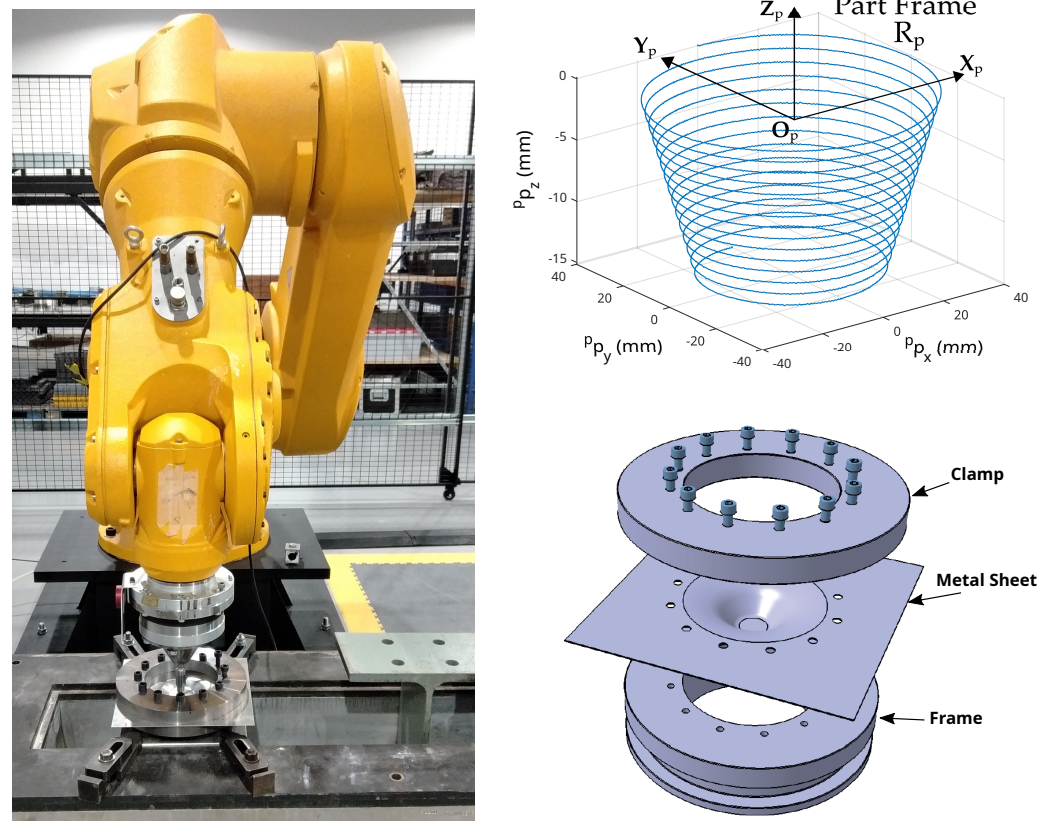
Position of the ISF setup inside the robotic cell (left); desired tool path and CAD model of the clamping system with a formed metal sheet (right).
